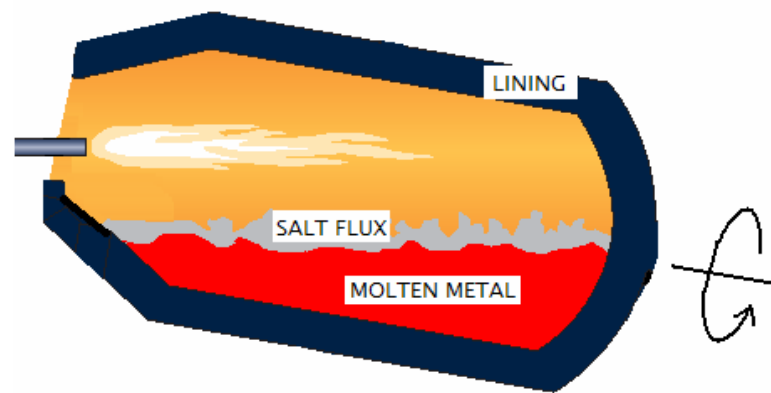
Schematic drawing of Tilt Rotary Furnace
